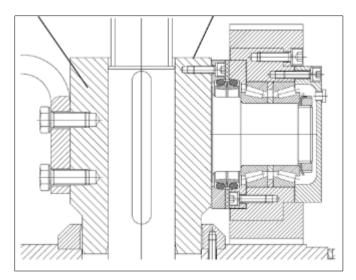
Bearing design solution of the roll of flat die pelleting press [25]
